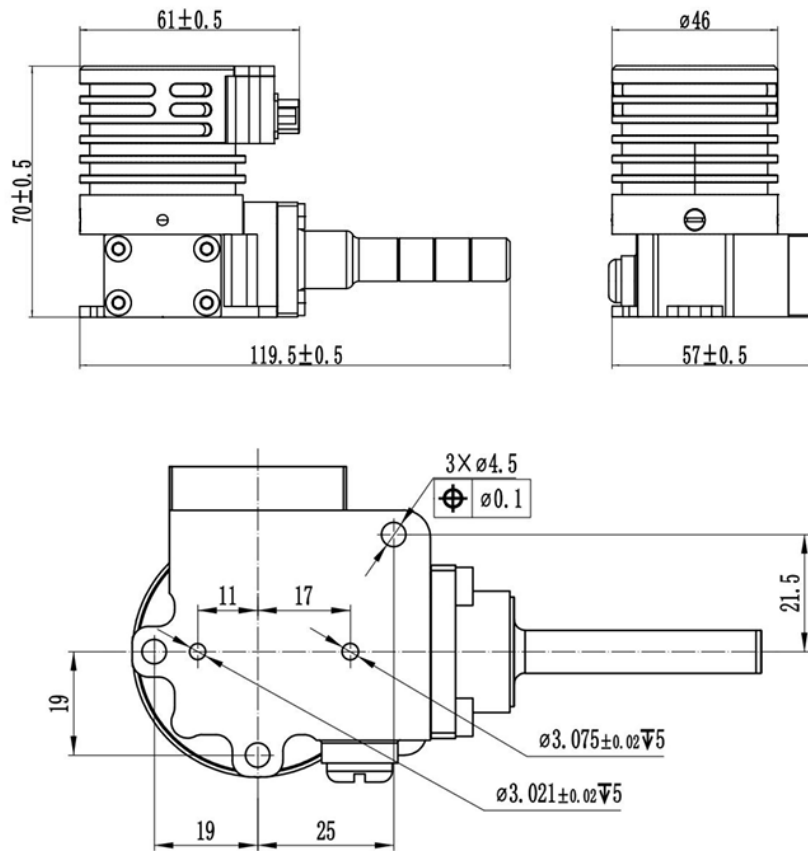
Outline, Mounting Interfaces, and Dimensions of BSI-05 Cooler
